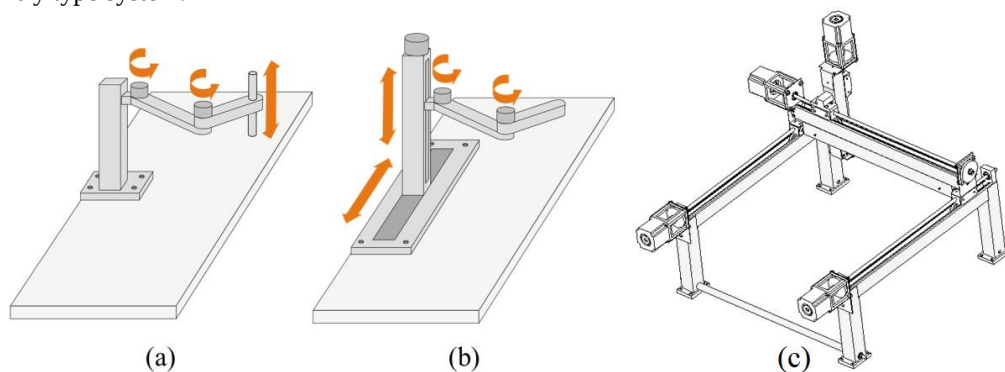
Mechanical assembly: (a) traditional SCARA, (b) SCARA extended and (c) gantry.
